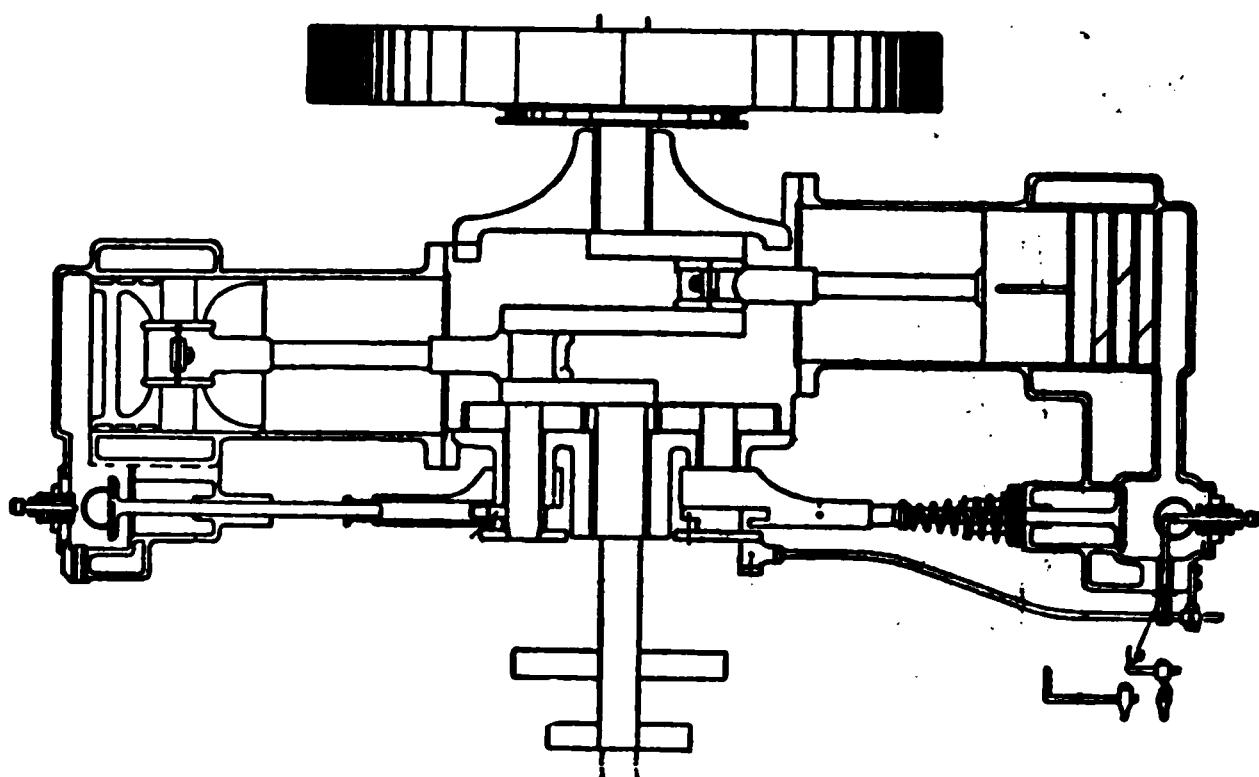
Sectional Diagram of the Haynes-Apperson Double-Opposed Cylinder Motor, showing valve arrangements and details of primary ignition device.
